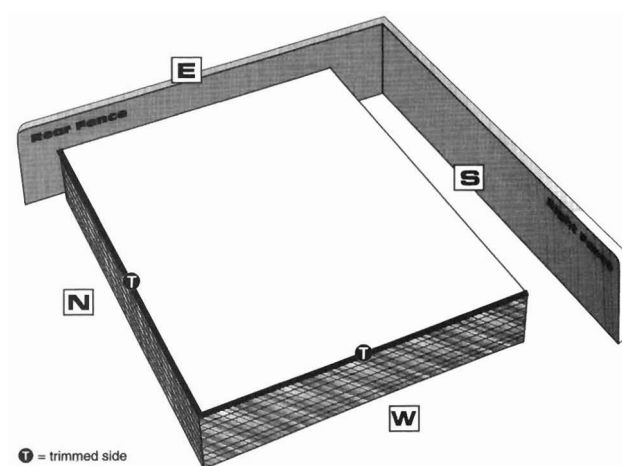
The cutting load is rotated one-quarter turn clockwise, and a second side is trimmed.
